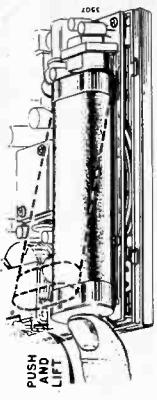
View Showing Method of Removing Battery Holder from Chassis Board.
